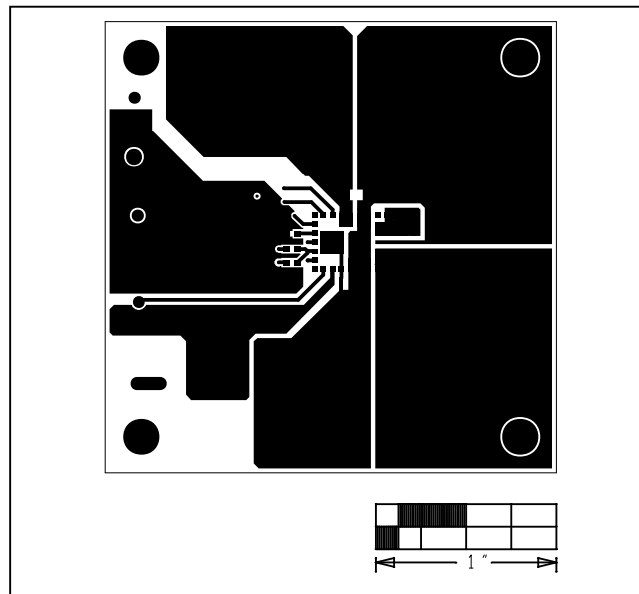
MAXM17544 EV Kit PCB Layout—Component Side
